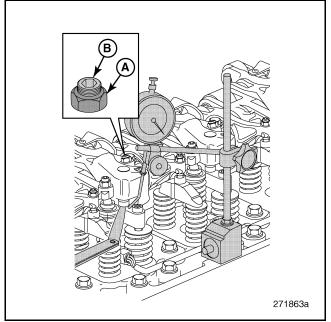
Brake Rocker Arm Adjustment with Dial Indicator
